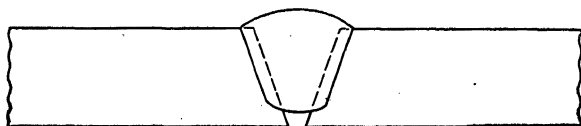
Poor penetration. The weld has not completely penetrated the joint.
